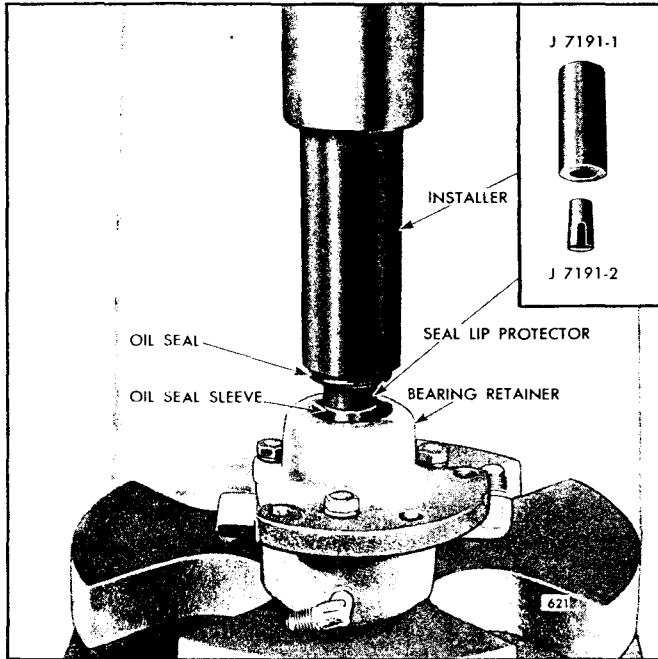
Installing Pump Shaft Oil Seal in Bearing Retainer
